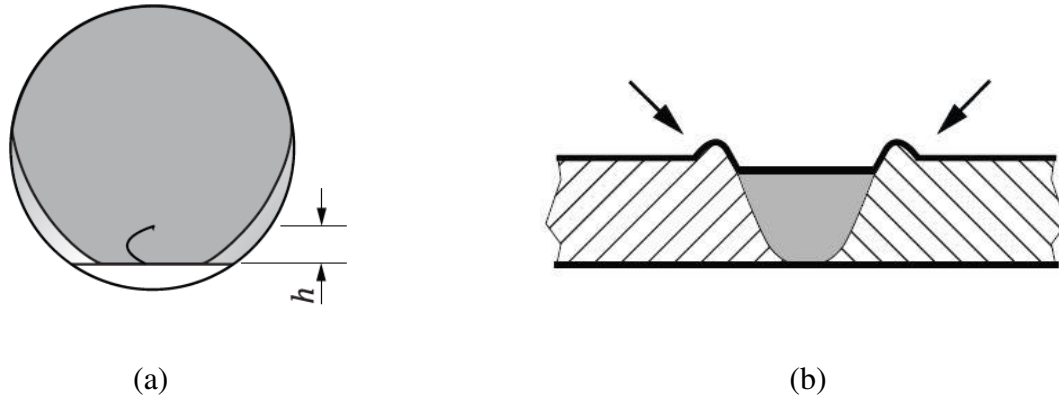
2: Flaw Mechanisms: (a) Root Flaw, (b) Toe Flash [ISO, 2020].
